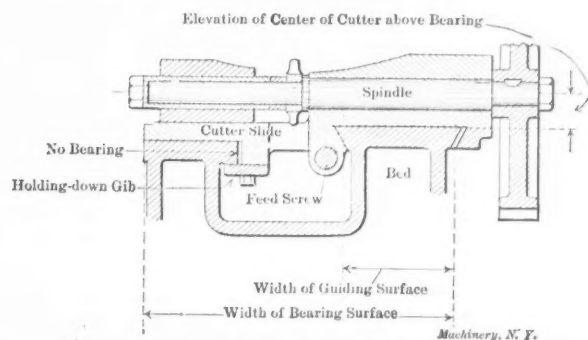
Cross-section through Cutter Slide of Typical Gear Cutter, illustrating Certain Principles relating to Accuracy and Cutting Power.
